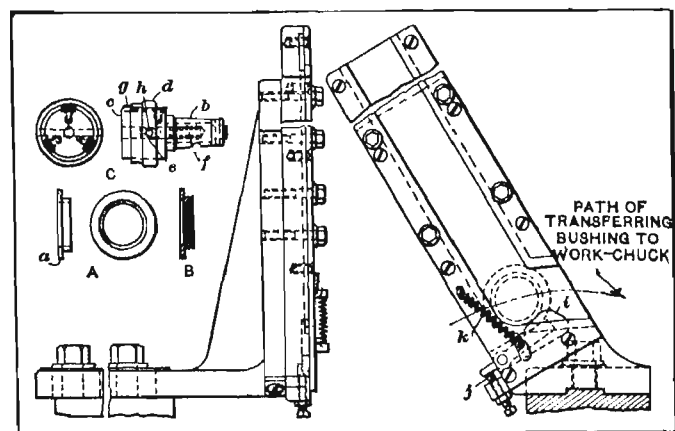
Magazine Attachment for Handling Parts Shown at A and B
